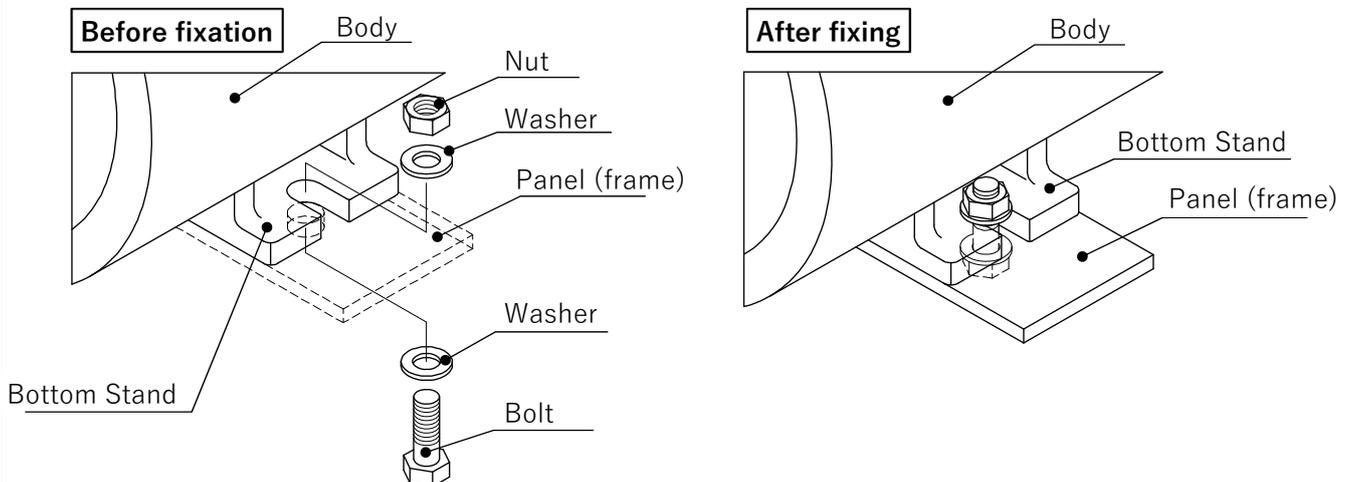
Bottom stand fixing (Nominal size 65~100mm)
